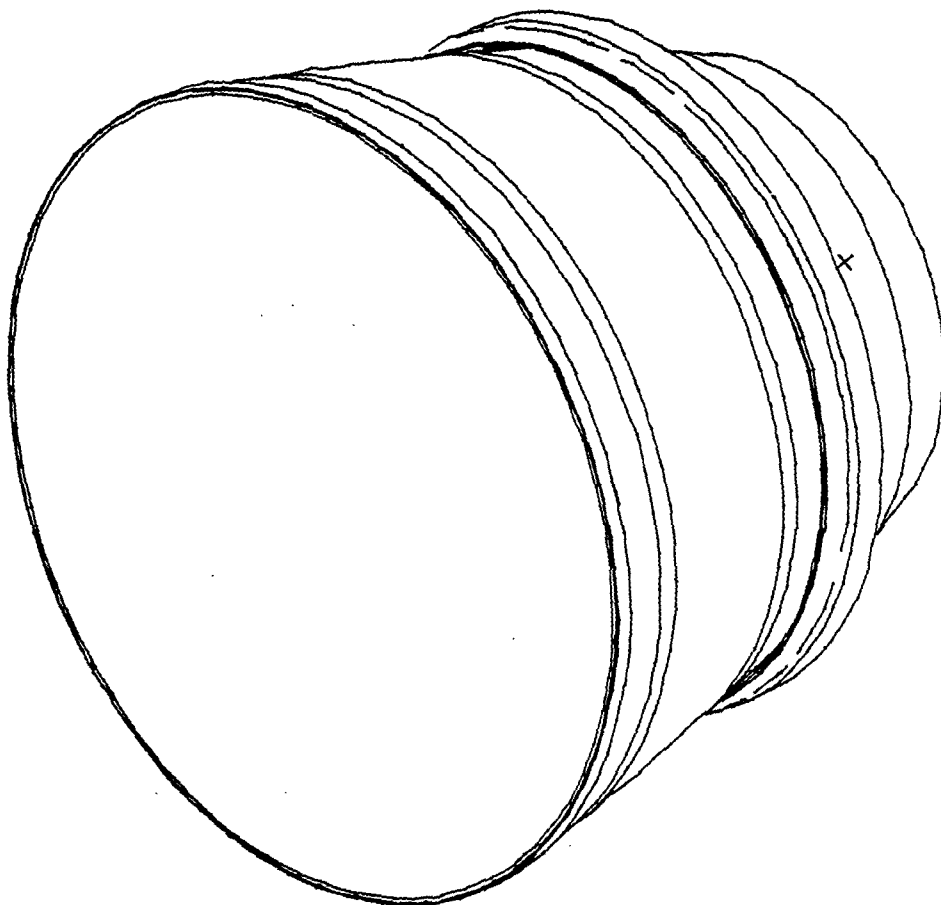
HPN Aft Exit Cone Assembly Prior to Modification
